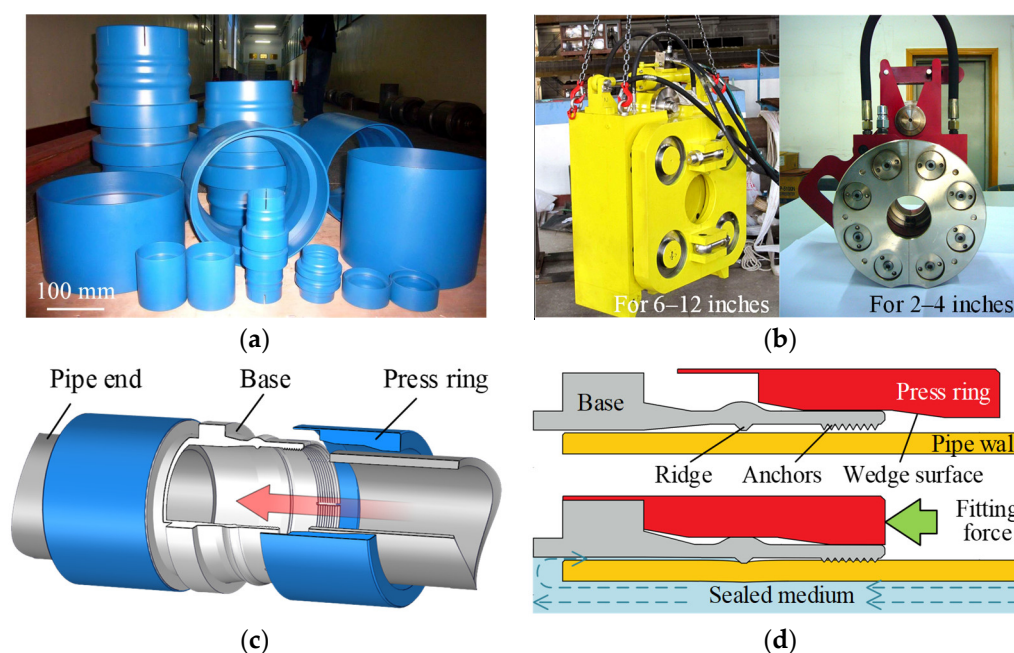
(a) Compression connector parts; (b) fitting tools; (c) connector assembly; (d) fitting process.
